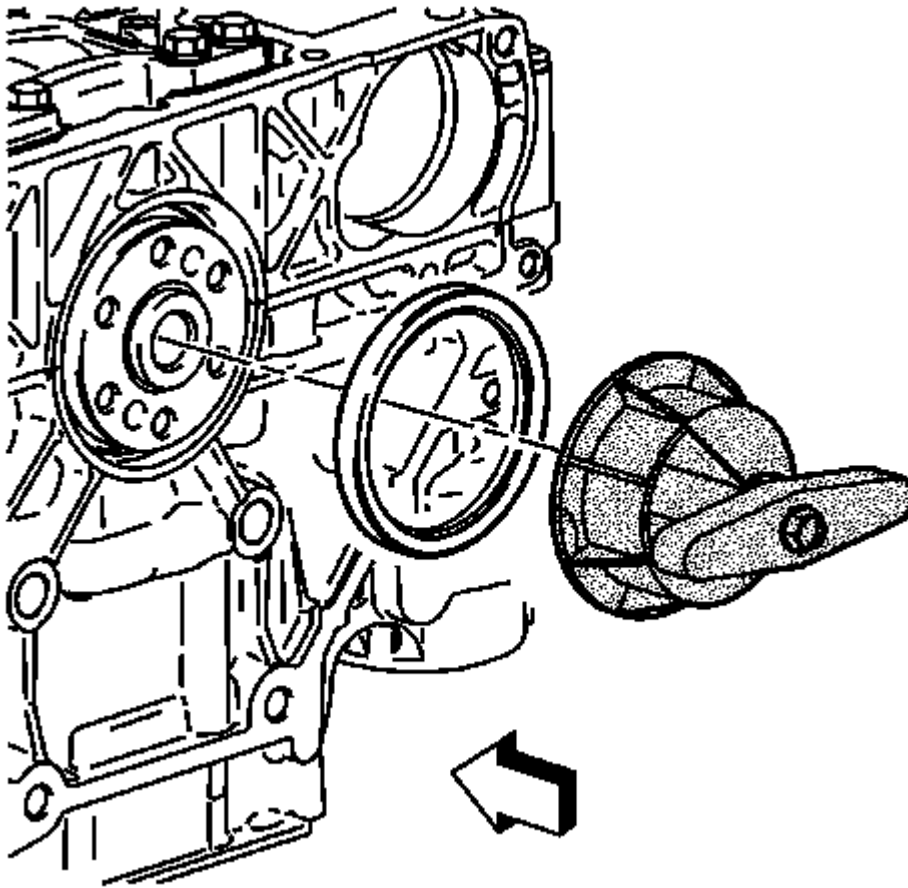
View Of Crankshaft Rear Oil Seal & Special Tool J 42067
